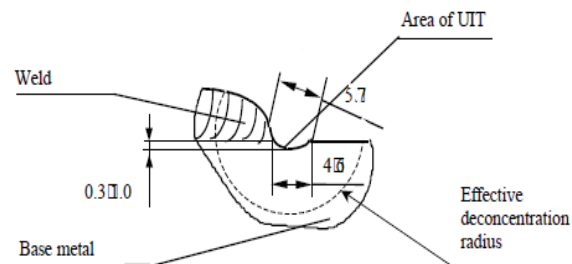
Recommended groove profile after UIT, specifically for medium strength steel welded joints
